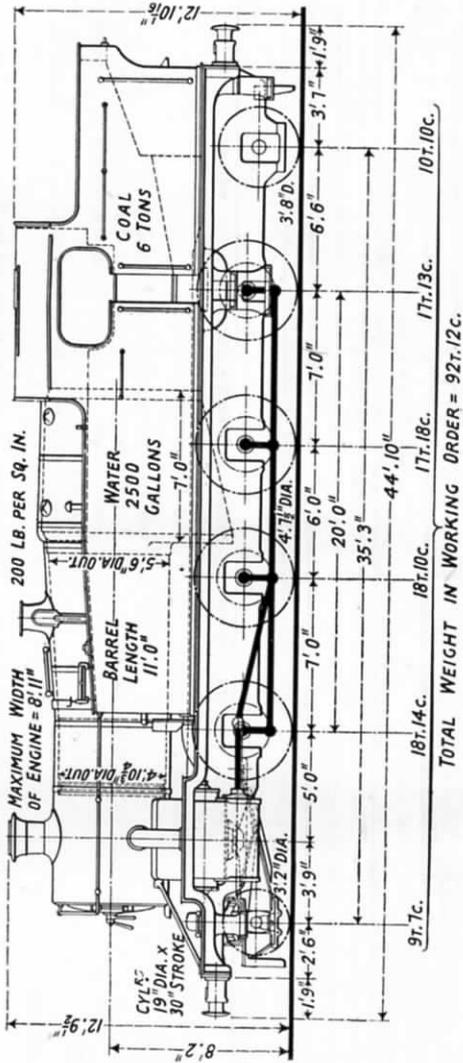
"7200" CLASS 2-8-2 TANK ENGINE, G.W.R.
